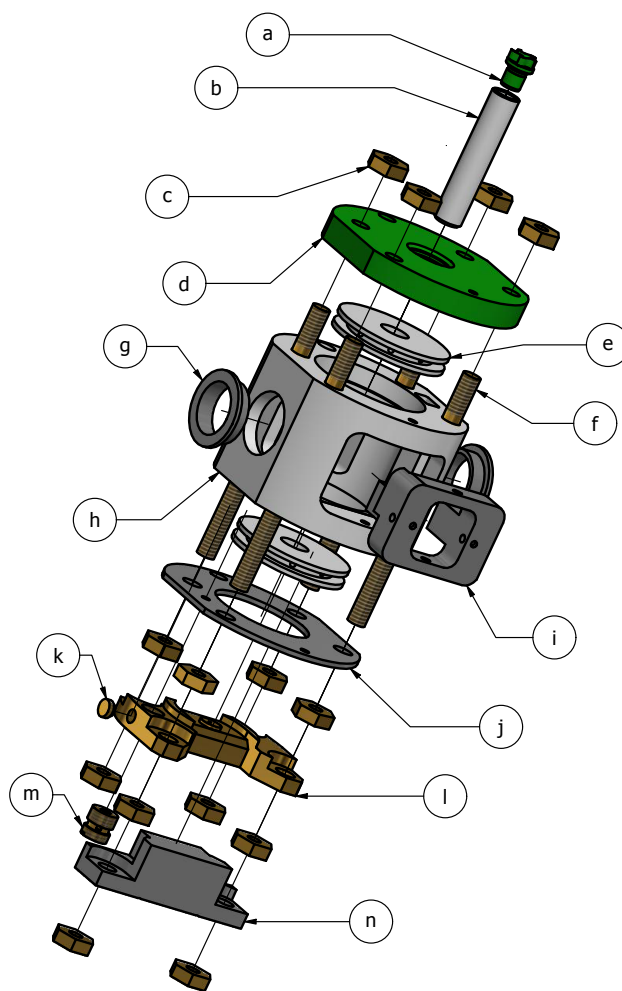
Exploded view of the 3.2 mm MAS stator assembly. The components of the stator assembly are: (a) drive cap, (b) MAS rotor, (c) brass nut, (d) drive plate, (e) radial bearing, (f) threaded rod, (g) gas inlet bushing, (h) stator body, (i) coil block, (j) bottom plate, (k) axial bearing plate cap, (l) axial bearing plate, (m) Bernoulli valve, and (n) fiber optic block.
